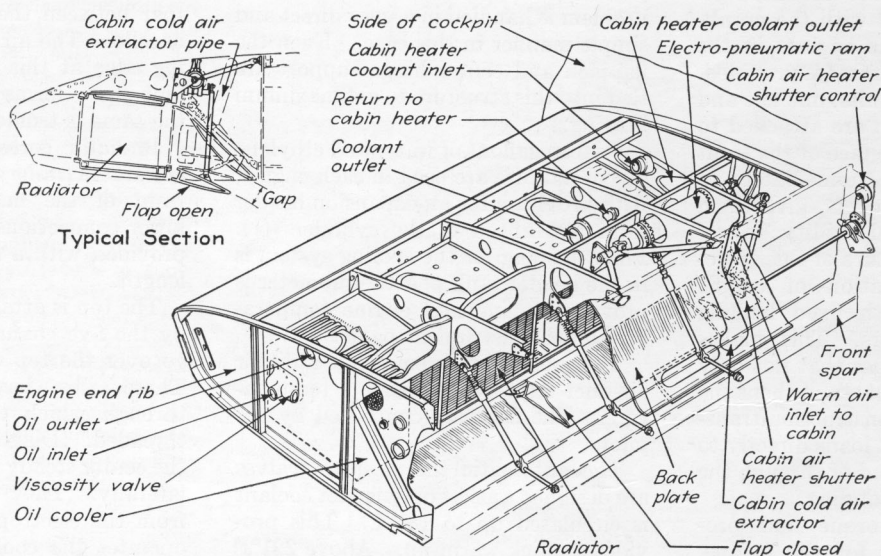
The cooling unit in three sections, seen from the rear: oil cooler at the left; engine radiator on the right. The cabin heater is heated by radiator coolant.
